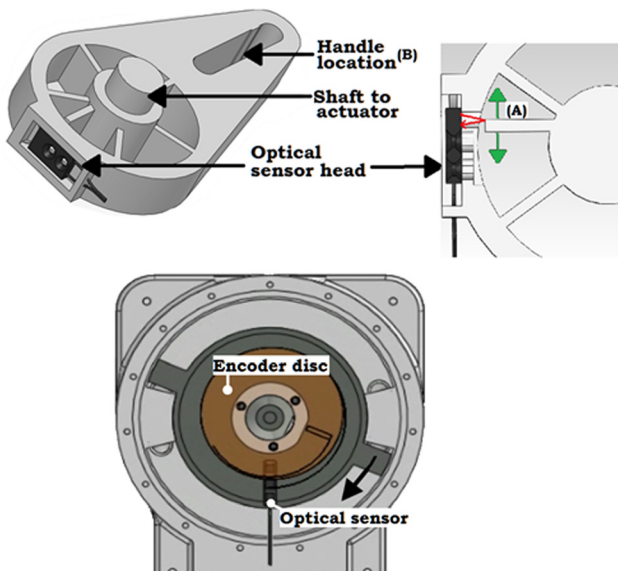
The top panel shows drawings of the torque sensor with the knife-edge method to detect the displacement of (A) with regards to the sensor head when a force is applied to (B). The bottom panel shows a top view drawing of the absolute optical position sensor. In this rendering, the encoder disk is made transparent so that the optical sensor can be seen. Rotor direction of motion is indicated by the arrow. The position sensor is in one extreme resulting in the minimal amount of reflective surface from the encoder disk.
